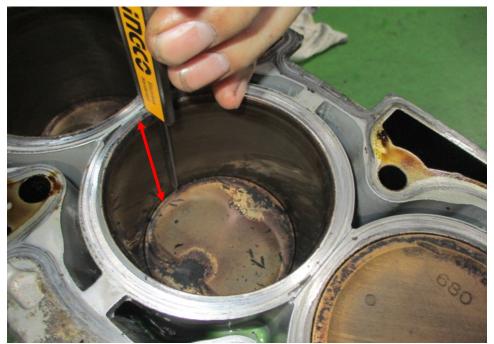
shows measurement of the stroke (arrowed) for cylinder 2 of the Mitsubishi engine that I had inspected. The bore and stroke measurements of the Mitsubishi engine were carried out using a digital Vernier Caliper that was calibrated before the start of measurements.
